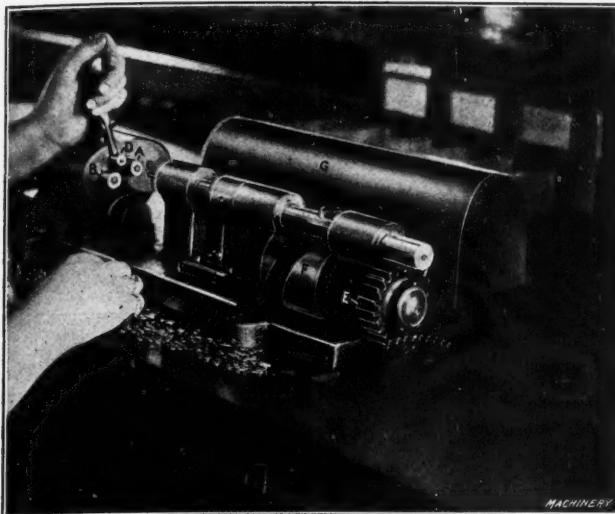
Special Machine used for assembling Odometer Gear Clusters
